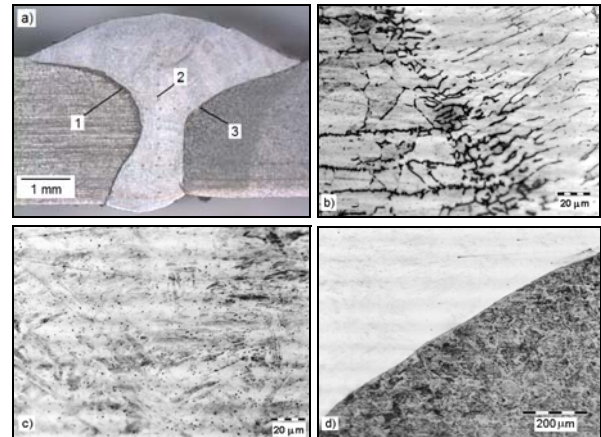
LHW of LCS-SS thin sheets: a) weld cross-section macrostructure; b) optical microstructure of the HAZ in SS and weld FZ; c) weld microstructure; d) optical microstructure of the FZ and HAZ in LCS.
